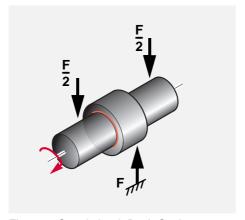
Steady load, Bush Stationary, Shaft rotating
